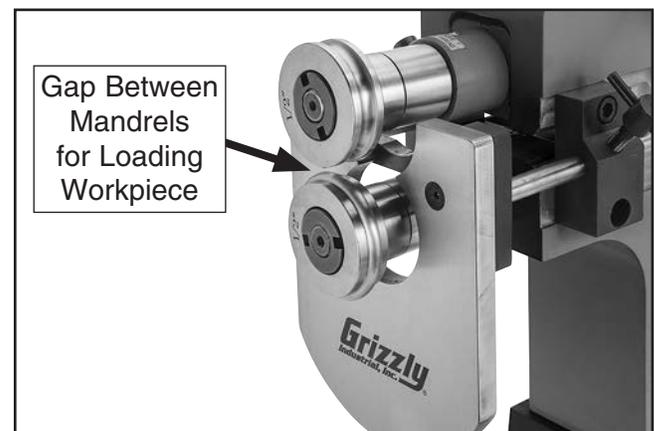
Upper mandrel raised in preparation for loading workpiece.
